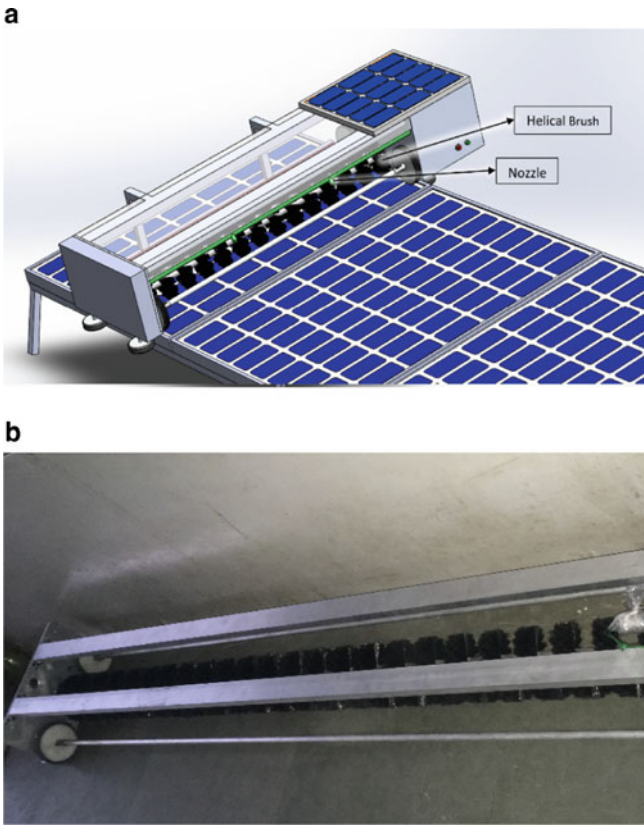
a Rear side of model showing the nozzle assembly. b Front side of nozzle with wiper
